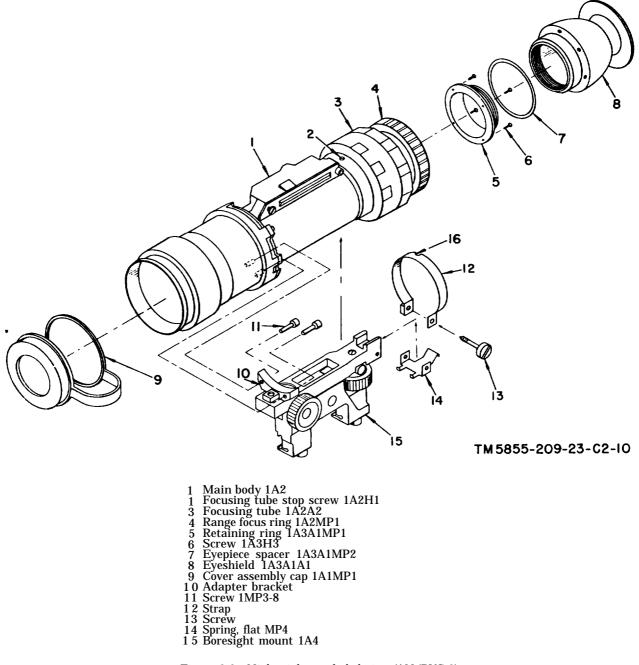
Night sight, exploded view (AN/PVS-3).
